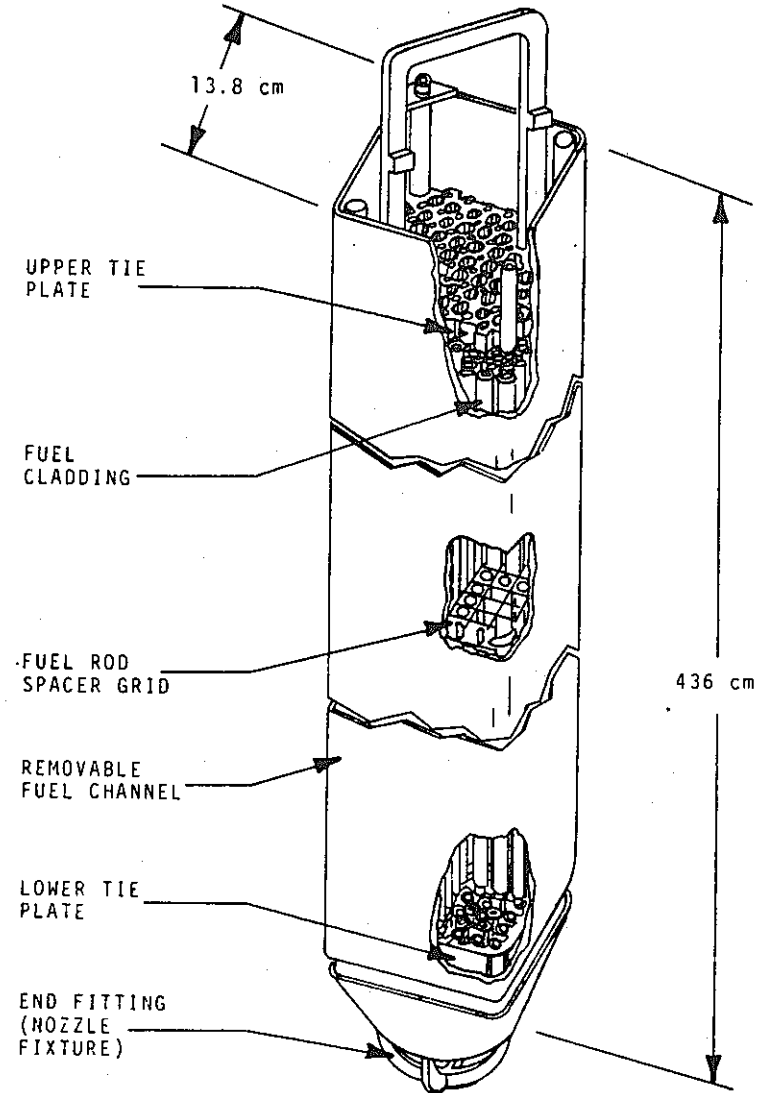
BWR Fuel Assembly⁽⁴⁾
